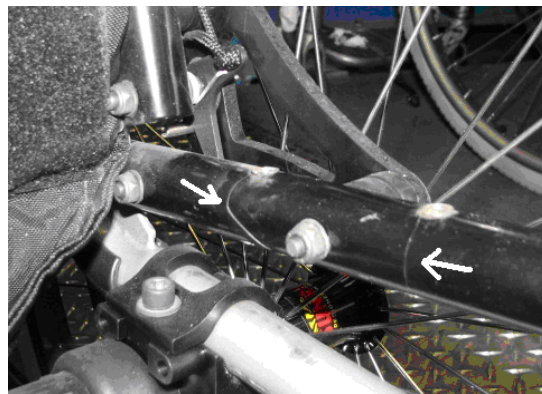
Fracture lines (arrows) around the screw holes for the mounting plate between the seat plane and backrest of an Invacare-A4 wheelchair.
